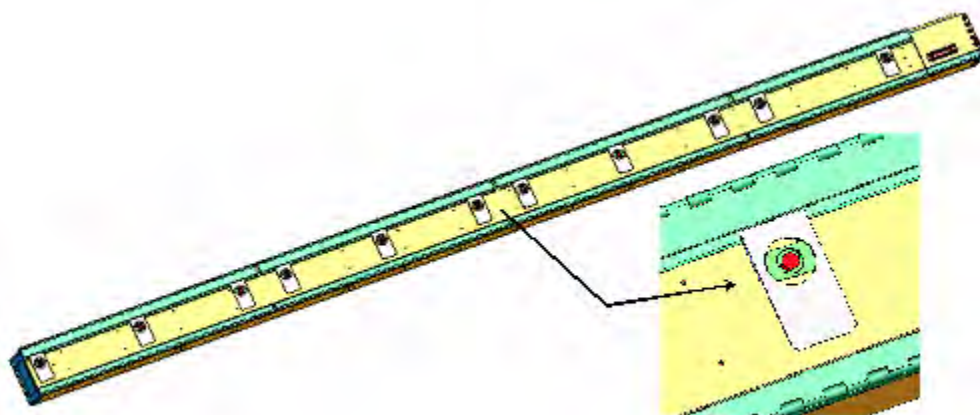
Clamshell Closure Latches and Keeper Bolts
